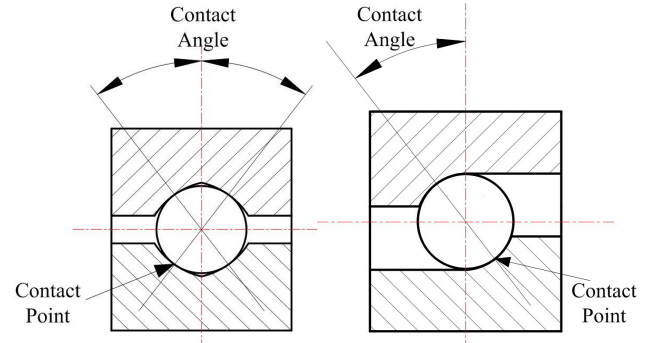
Four-contact-point ball bearing and angular contact bearing
